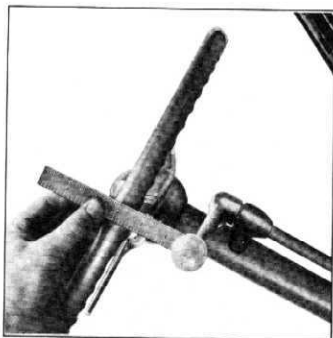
Checking Gearshift Lever to Steering Wheel Clearance
